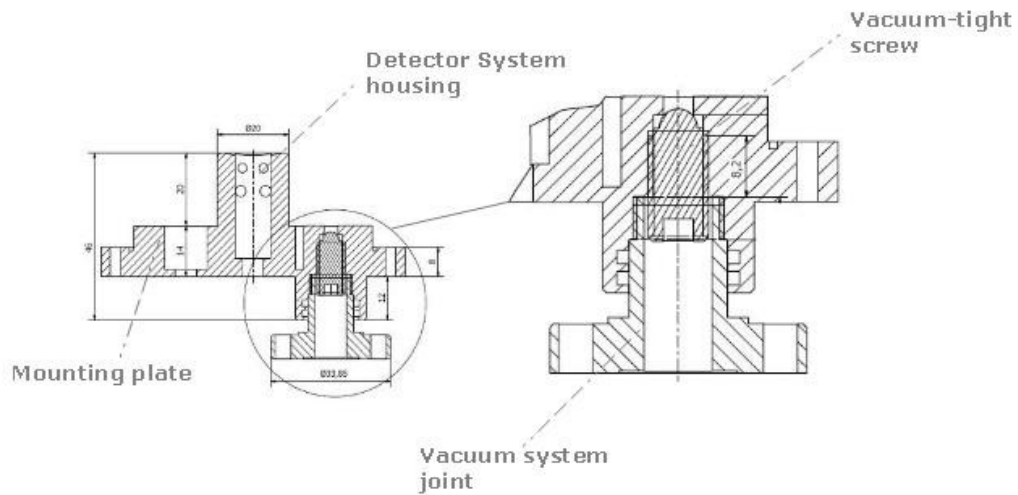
Mounting plate side view with the detail of the screw with tempered stainless steel sphere and the vacuum system joint.
